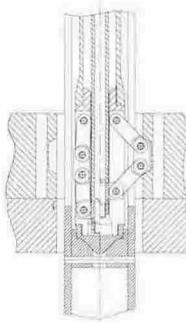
Extension Shaft Assembly used Link Type Locking Mechanism
